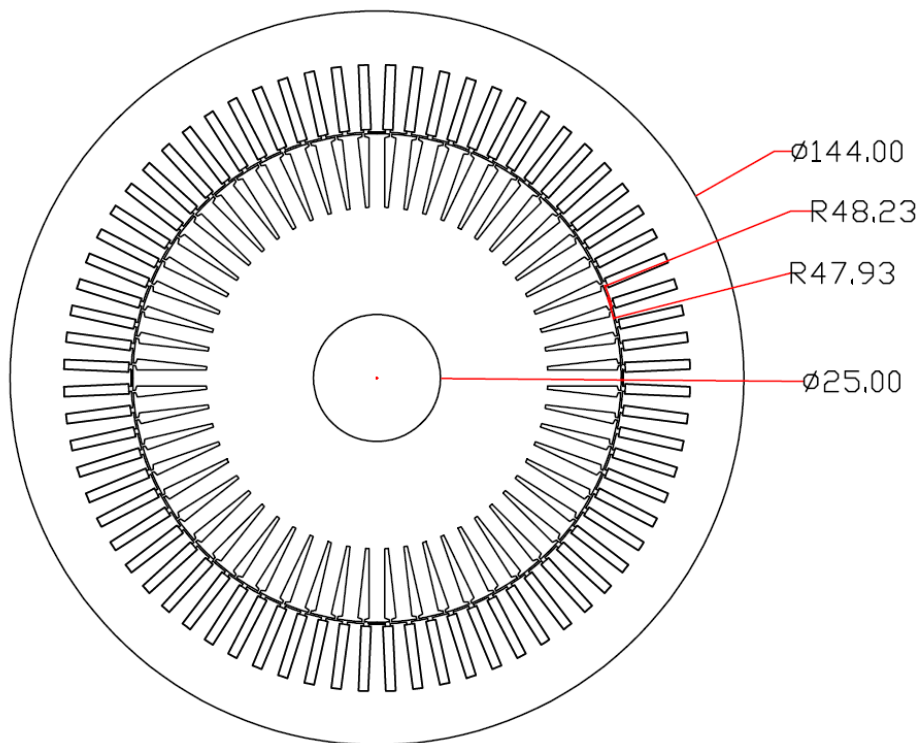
Radial drawing of baseline induction machine lamination.
